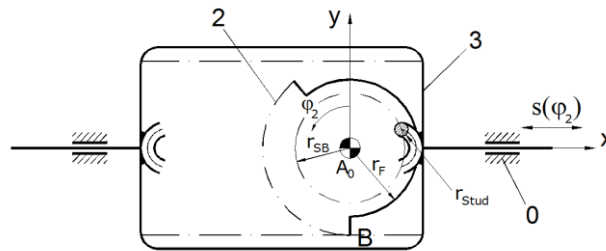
Kinematic schema of the gear mechanism with geared sector and double symmetrical rack
